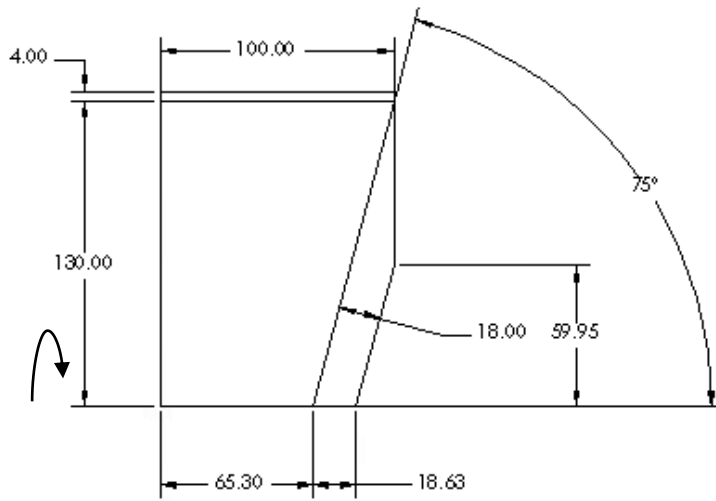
2D Drawing of 7.64 kg TNT Shaped Charge with 18.0 mm Liner Thickness (Dimensions are in mm).
